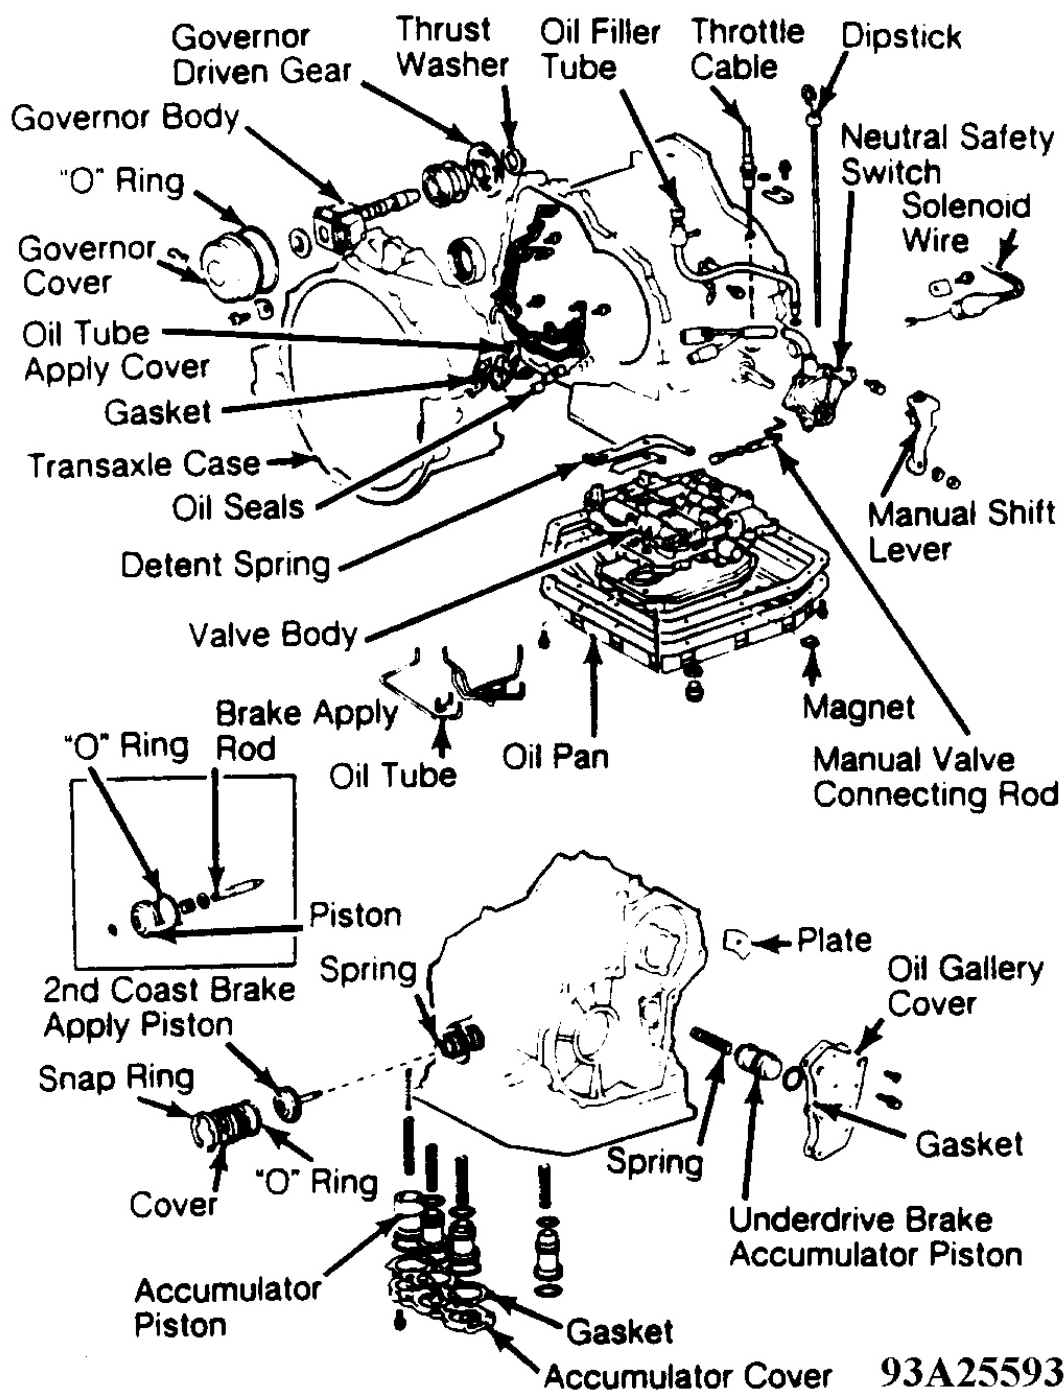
Exploded View Of External Components (A-240E & A-240L)
